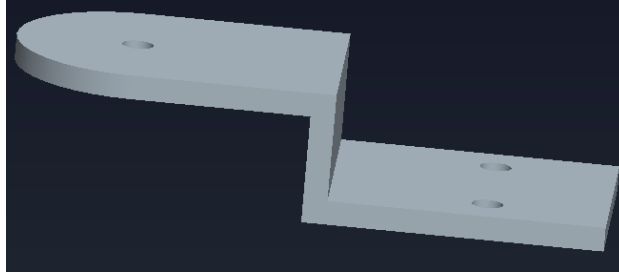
SHOWS THE ALUMINUM 6061 ARMATURE WHOSE BOTTOM LEVEL WILL BE CONNECTED TO THE PANELS AND UPPER LEVEL WILL BE HOLDING THE CONE
